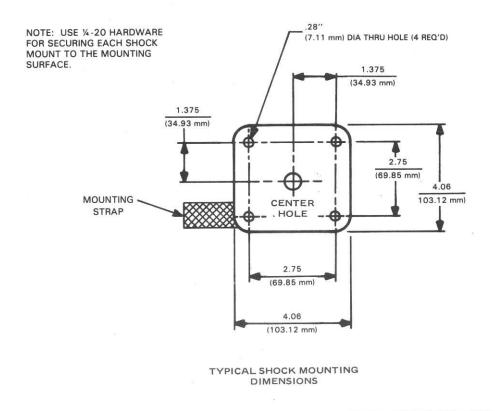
Shock Mounting Hole Pattern Dimensions
